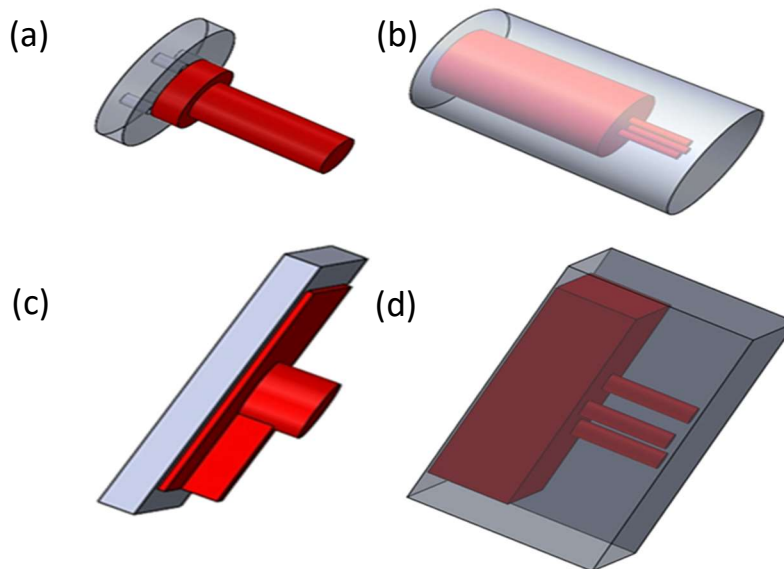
The schematic model for 3D Printed Molds. (a,b) The mold cap and mold for cylindrical microhand. (c,d) The mold cap and mold for square shape device.
